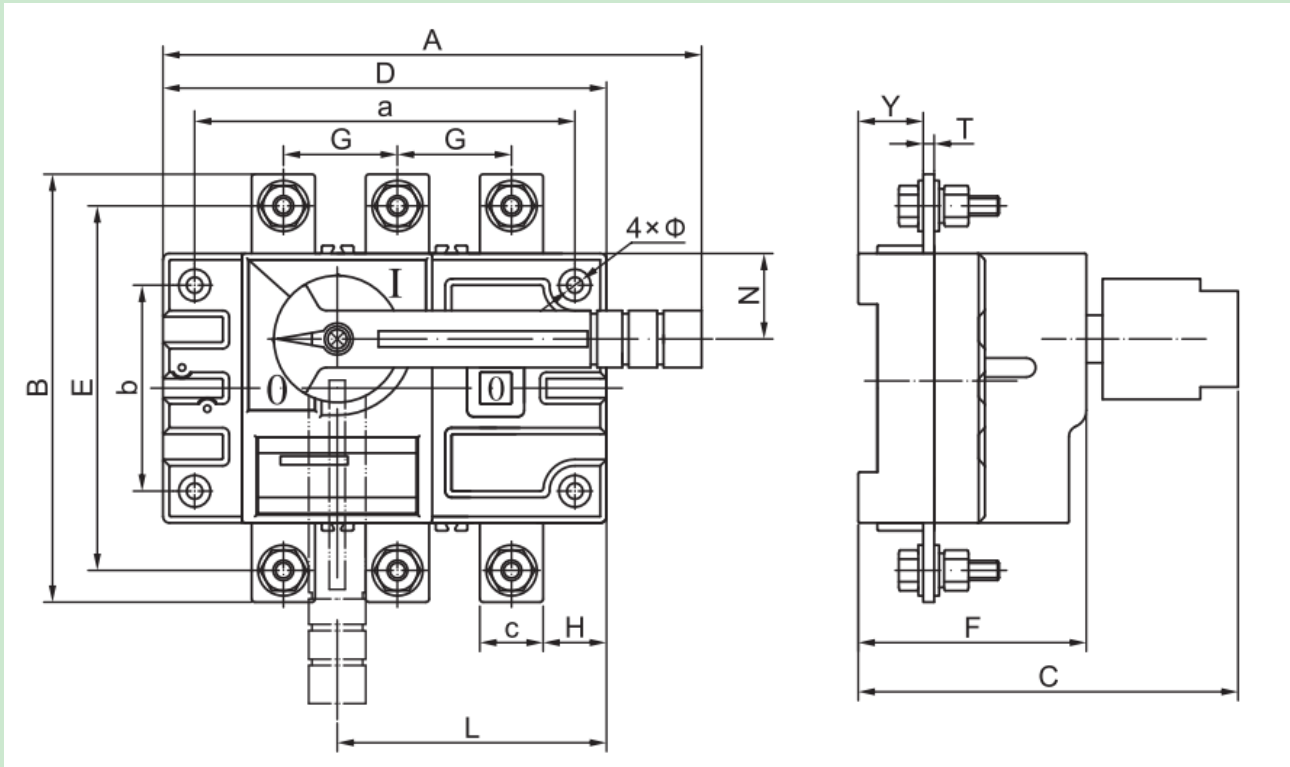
Installation dimensions of HGL and HGLi-125 ~630 switch disconnector in cabinets
